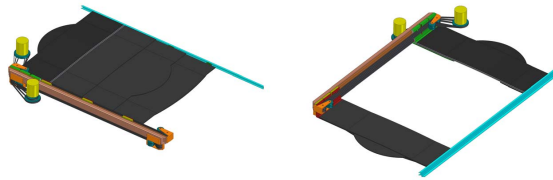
The shutter assembly includes three flat blades which stack when the shutter is open.
